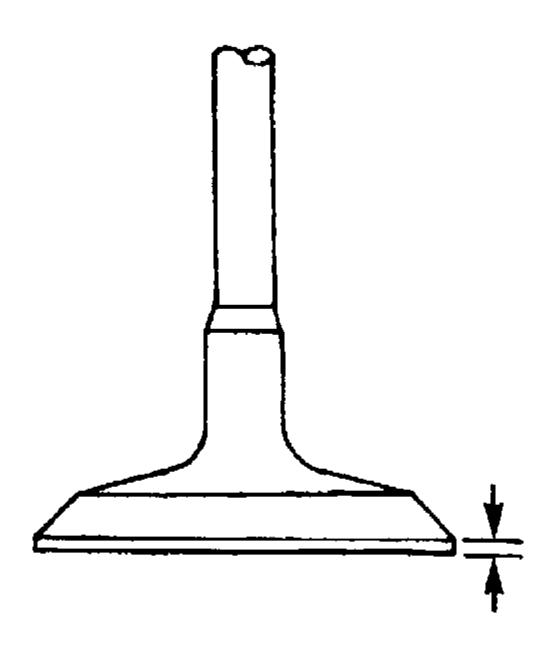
Inspecting Valve Margin Courtesy of GENERAL MOTORS CORP.
